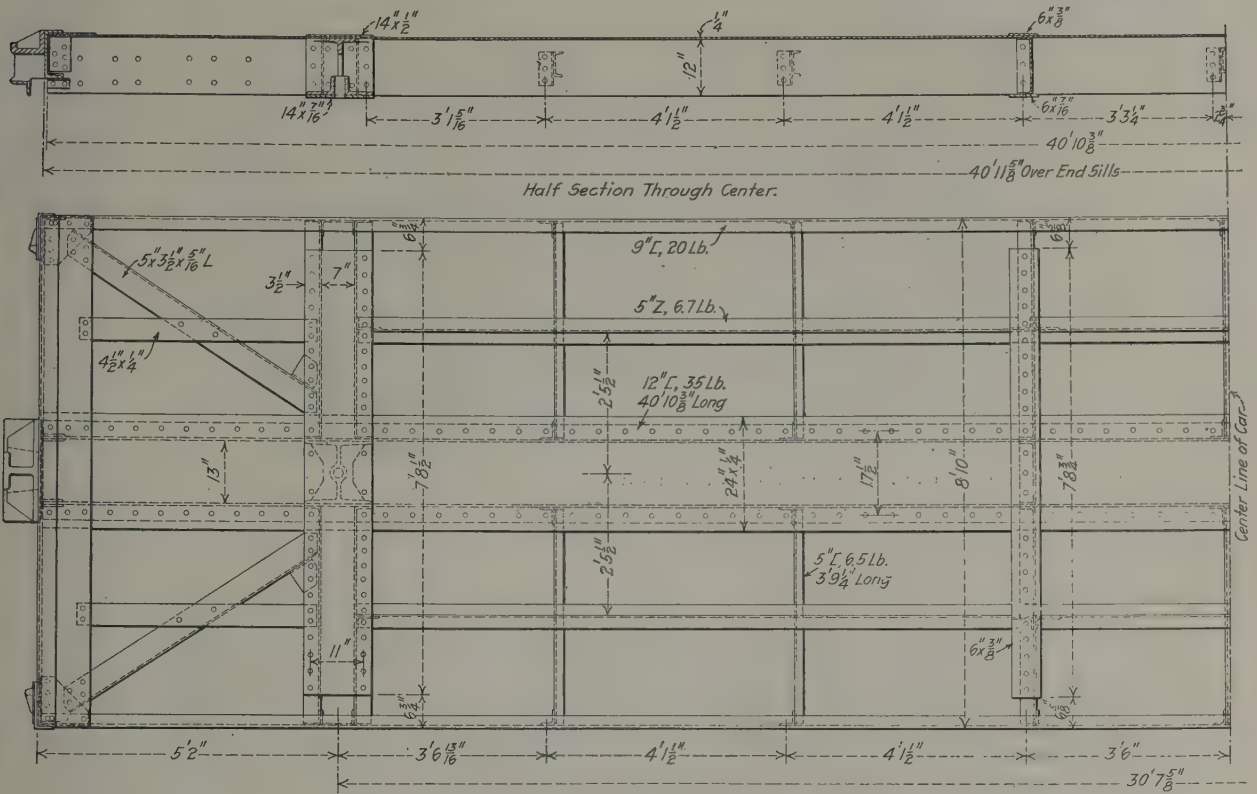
Steel Underframe for Santa Fe Stock Car.
